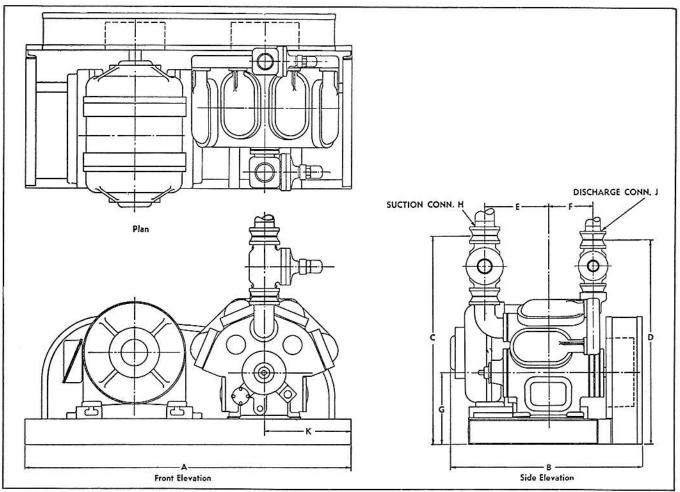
Dimensions - 4, 6 and 8 Cylinder Freon - Belt Drive
